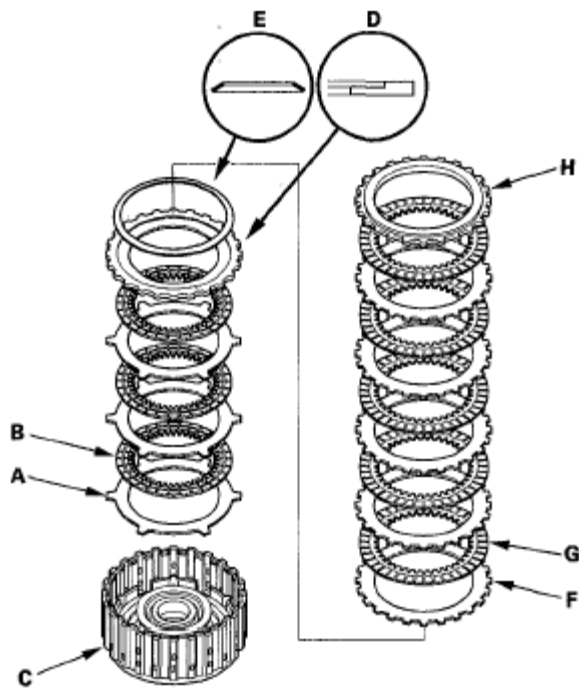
Assembling 1st/1st-Hold Clutch Drum Wave-Plates And Discs
